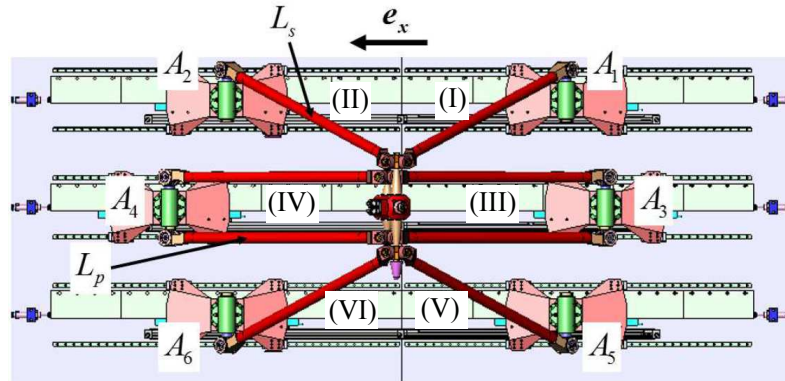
Facing CAD view of the parallel module of ARROW PKM with some notations. [22].
